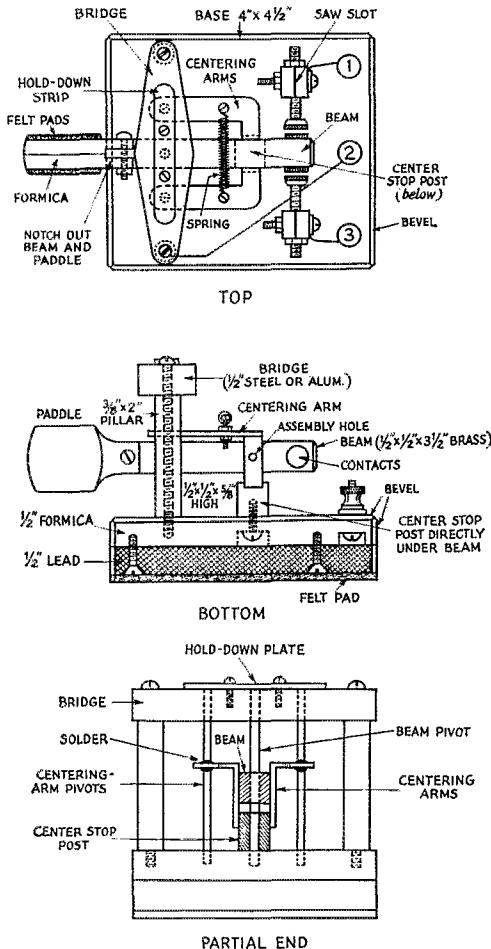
Top (upper), partial side (center), and partial end (lower) views of the sideswiper. End view is from paddle.
